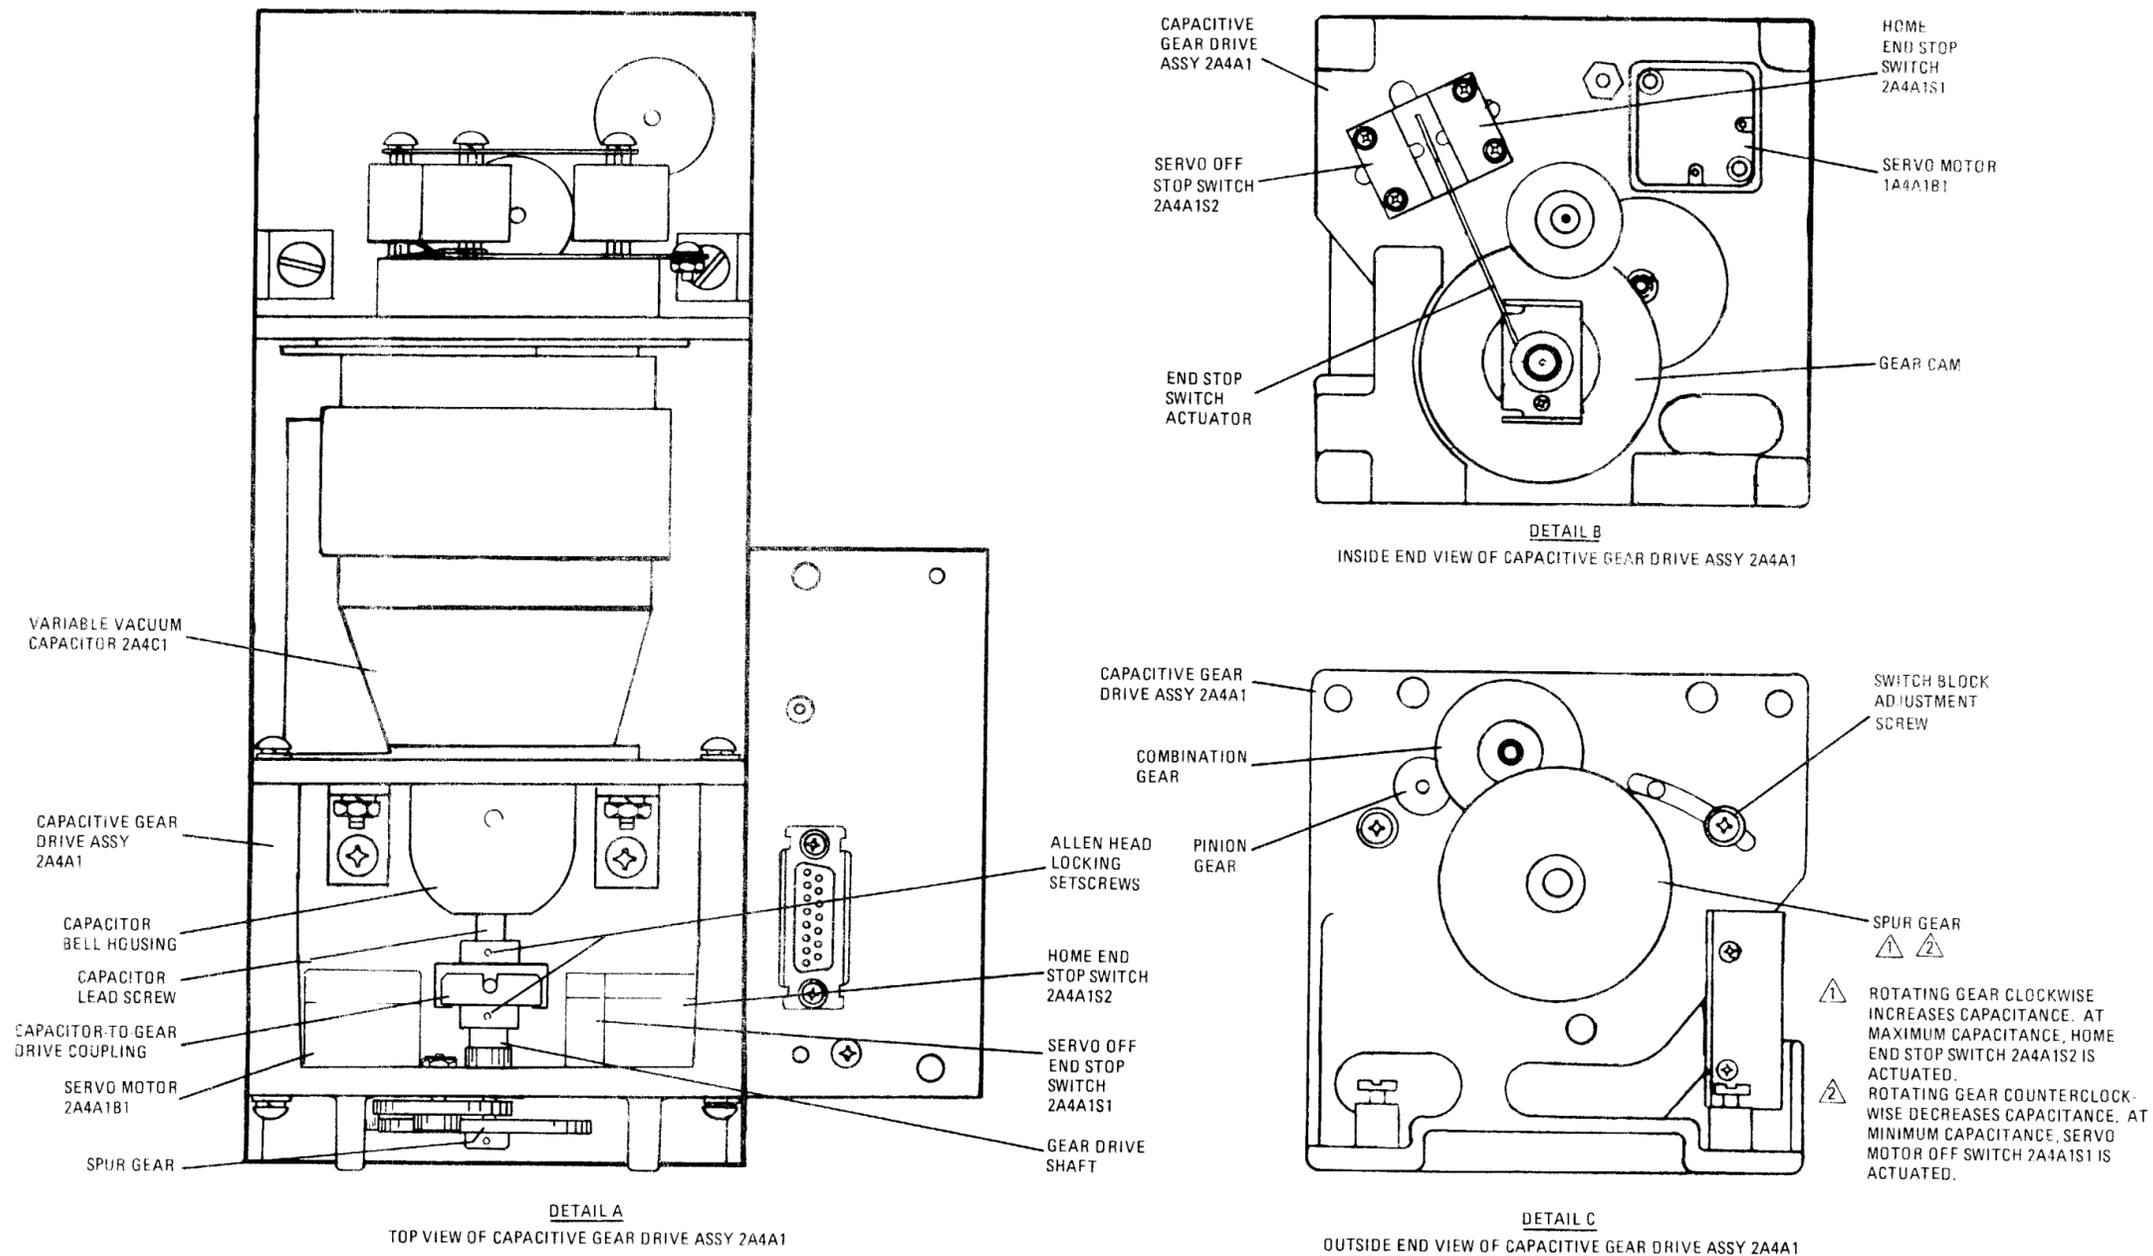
Capacitive RF Tuner Assembly 2A4 - Adjustment Detail Views
